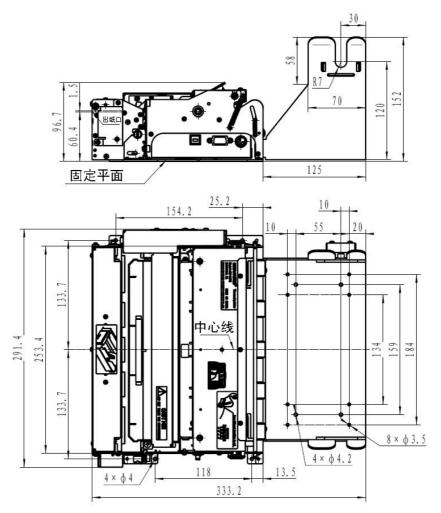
Structural Dimension Drawing of the Horizontal Paper Stand (335 * 294 * 150mm)
